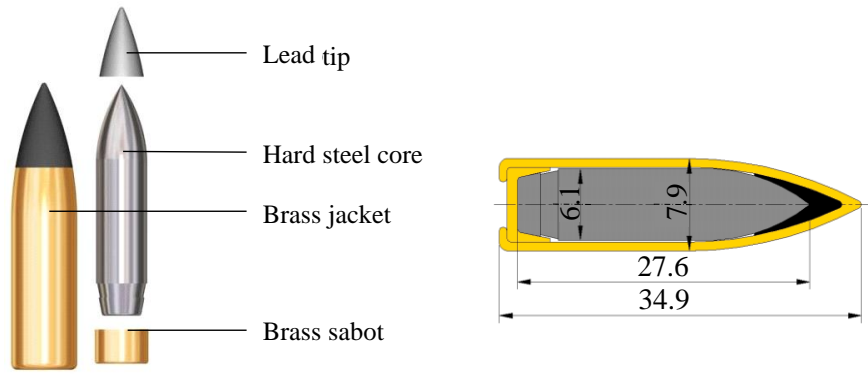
Schematic drawings and geometry of the 7.62 mm bullet (dimensions in mm).
